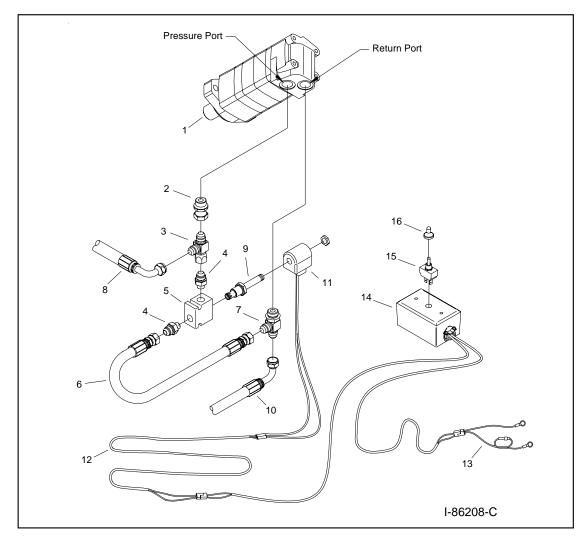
12 VDC Remote Apron Control Parts Detail
